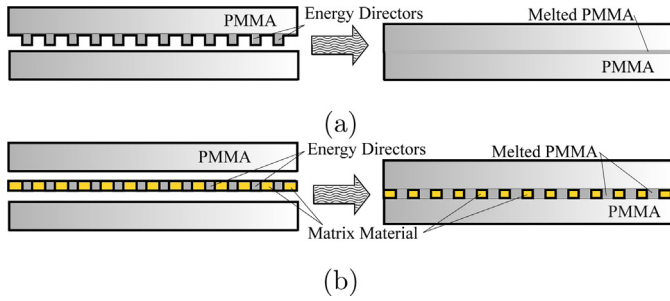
Illustration of polymer using (a) conventional and (b) composite film ultrasonic welding. In conventional ultrasonic welding, the energy directors melt and flow across the surface of the samples, resulting in a thinner fusion layer. In ultrasonic welding using composite film, the energy directors melt but maintains its height due to flow restriction by the matrix material.
